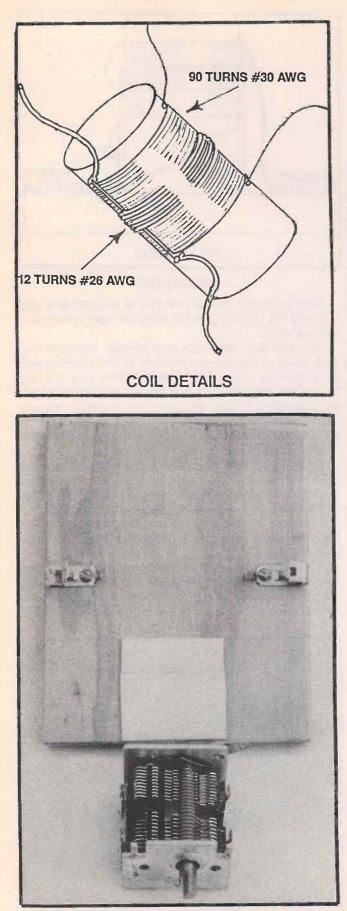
Positioning the double-sided mounting tape before securing the tuning capacitor and mounting the Fahnestock clips.
